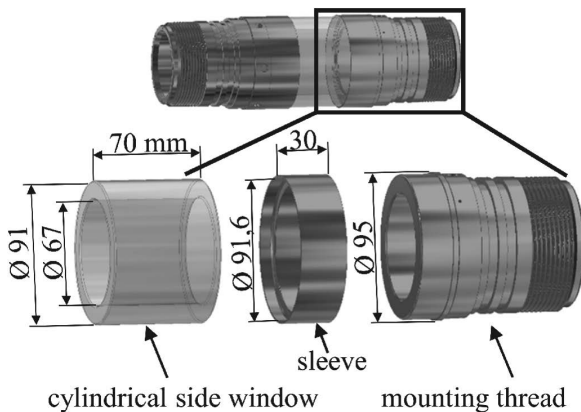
Current schematic design of the GeoKam side windows housing; top: side view, bottom: exploded view; joint between NiCr19NbMo and MgAl_2O_4 with sleeve brazed with AgCuInTi.
